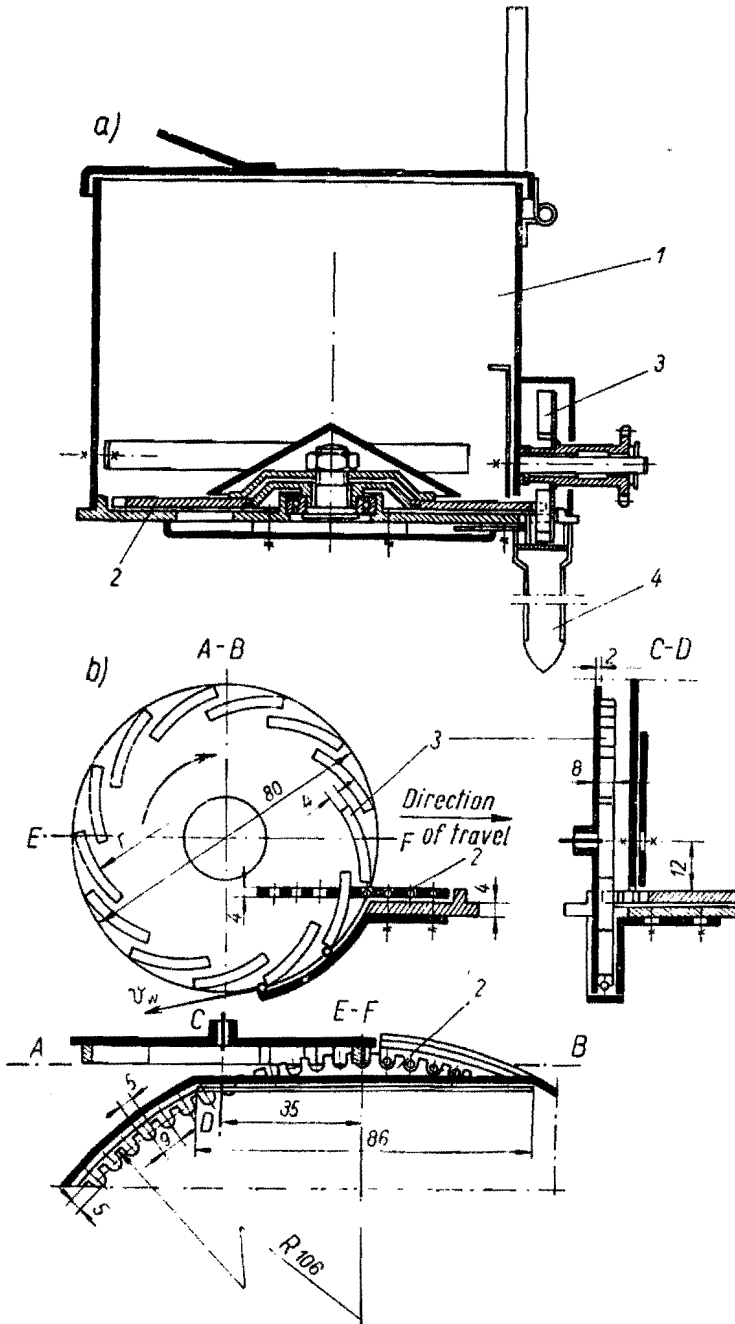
Precision drill with horizontal plate (Hagno system): 1 — hopper for prepared seeds; 2 — plate with indents; 3 — ejector; 4 — opener.
